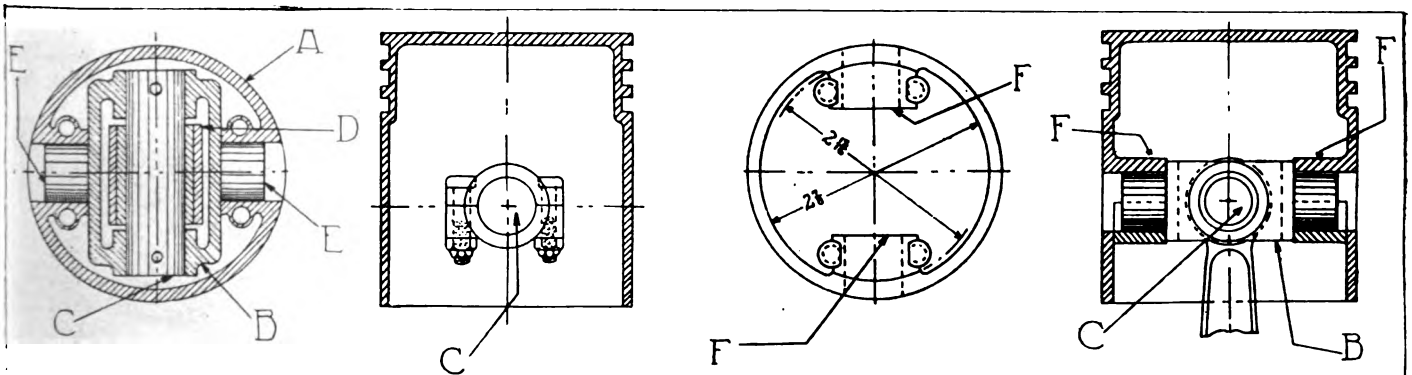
New Type of Wrist Pin Invented by Massachusetts Reader; A, Piston; B, Universal Joint; C, Wrist Pin; D, Connecting Rod; E, Projections of Universal Joint That Attach to Special Bosses in Piston; F, Special Bosses.
